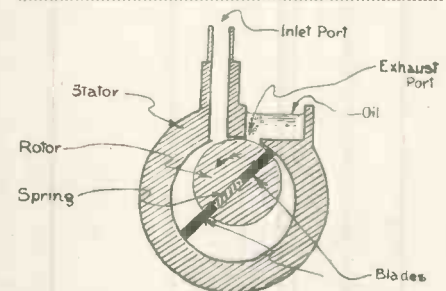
Details of rotary oil-sealed pump for obtaining rough vacuum.
